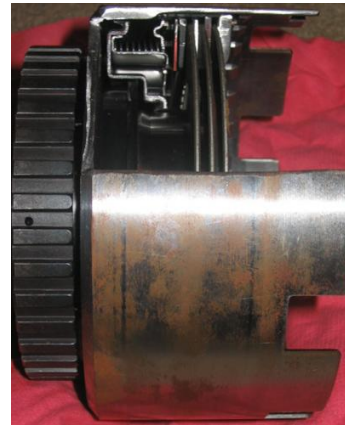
Sectional view of a typical multi-plate disk clutch assembly
